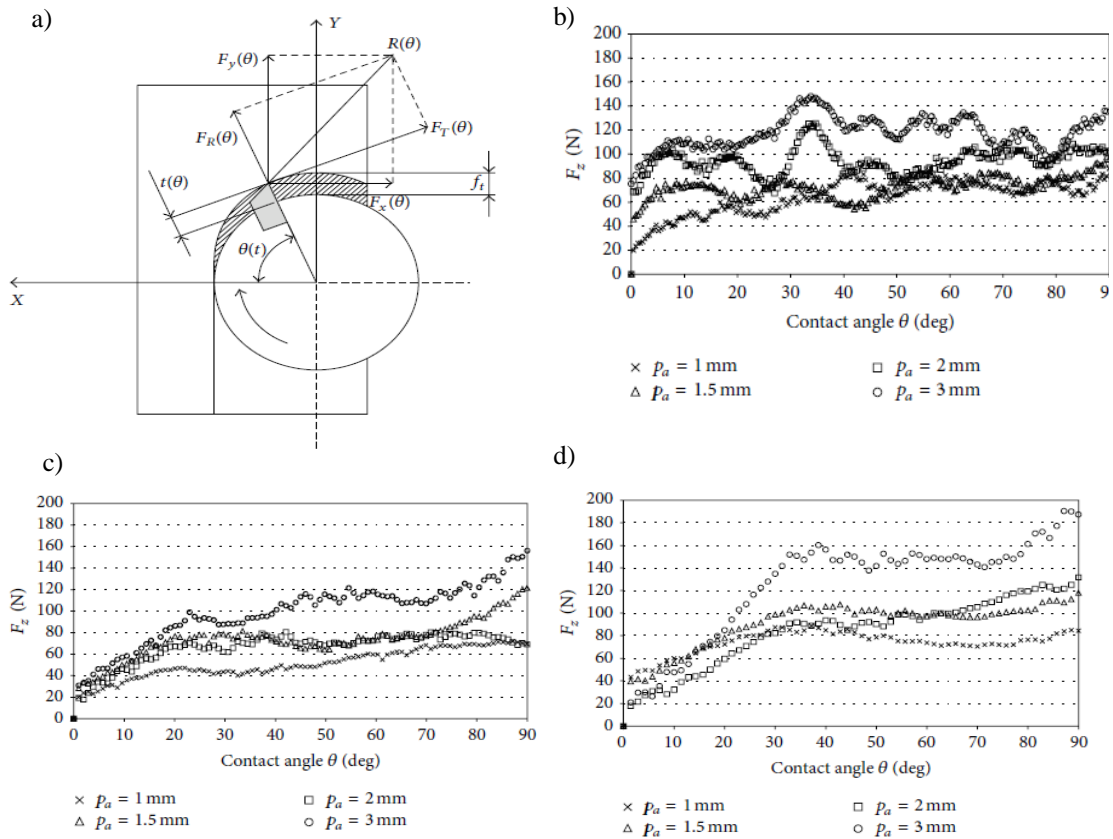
a) Representation of tangential and radial force components, F_z component vs contact angle with feed per tooth = 0.044 mm and cutting speed = a) 100 m/min, b) 100 m/min, c) 100 m/min [50]
